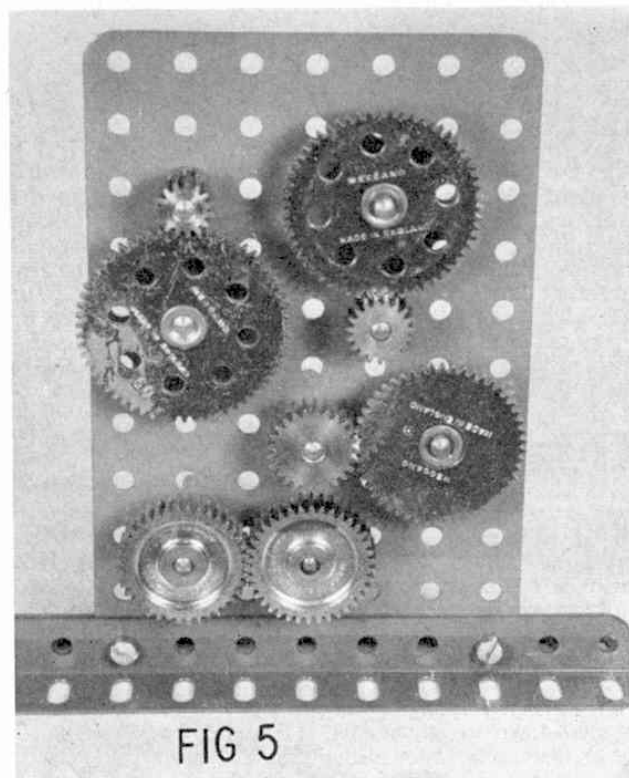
Pulleys, sprockets and gear wheels in combination to operate an accurate programming mechanism. Fig. 4. Meccano Sprocket Wheels paired-up to give direct meshing as heavy duty spur gears. Fig. 5. Range of pinions and gear wheels giving four different ratios ranging from 1 : 1 to 4 : 1.
